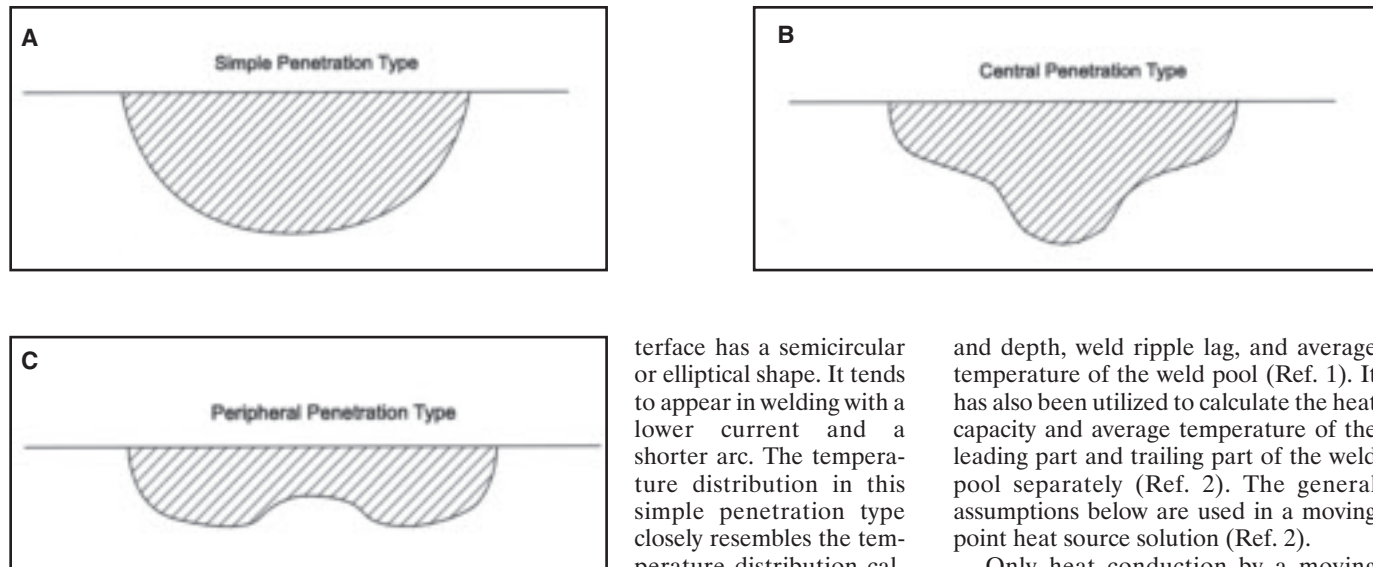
Three typical cross-sectional penetration types in arc welding
